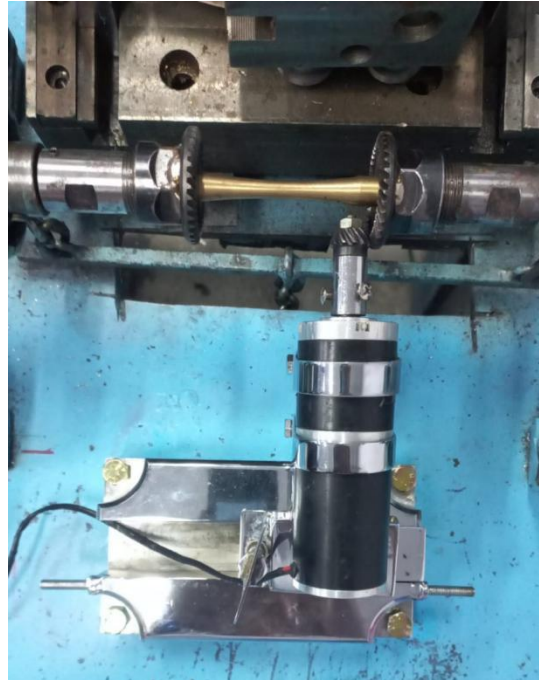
Collet nut driver mounted on an integrated rotary bending fatigue testing machine table
